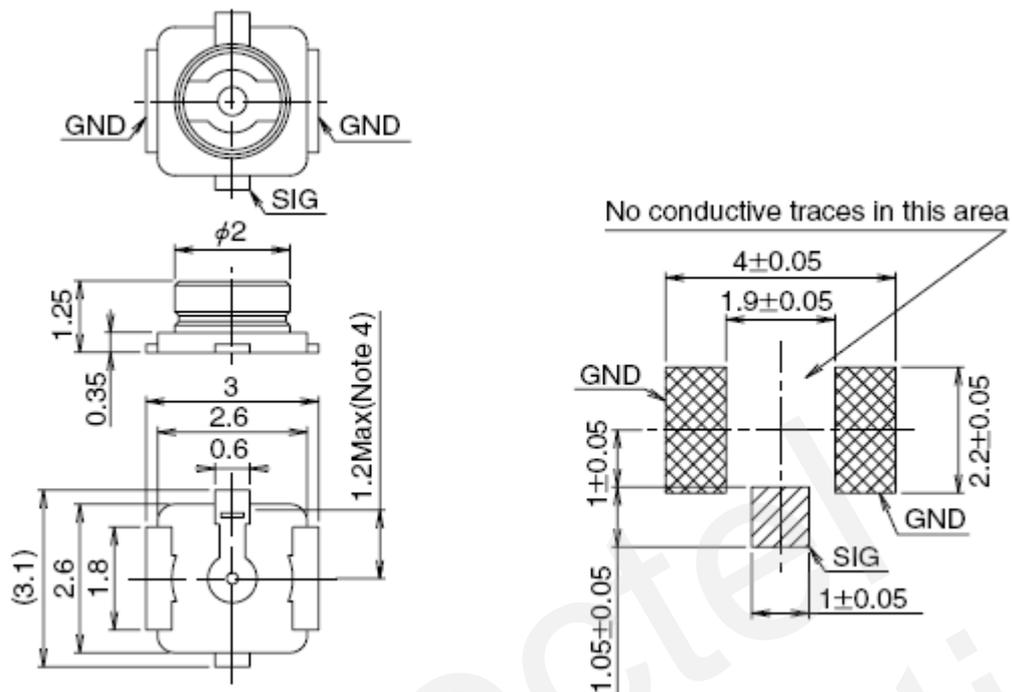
Dimensions of the UFL-R-SMT connector (Unit: mm)
